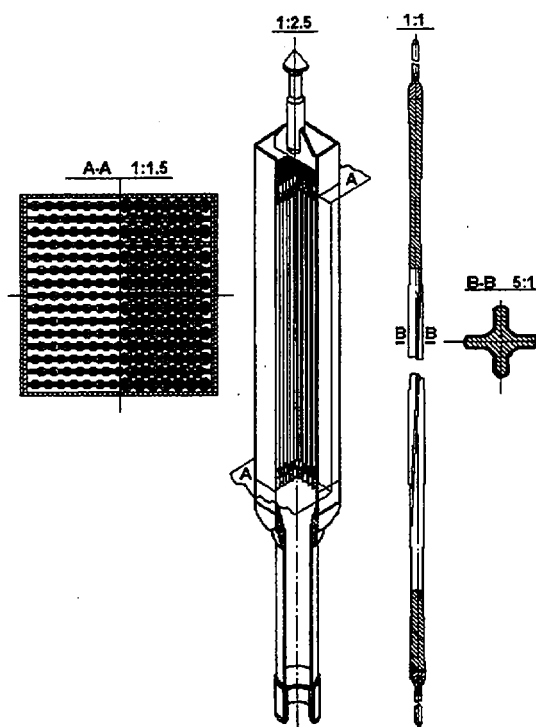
Reactor SM-2 fuel rod and fuel assembly
